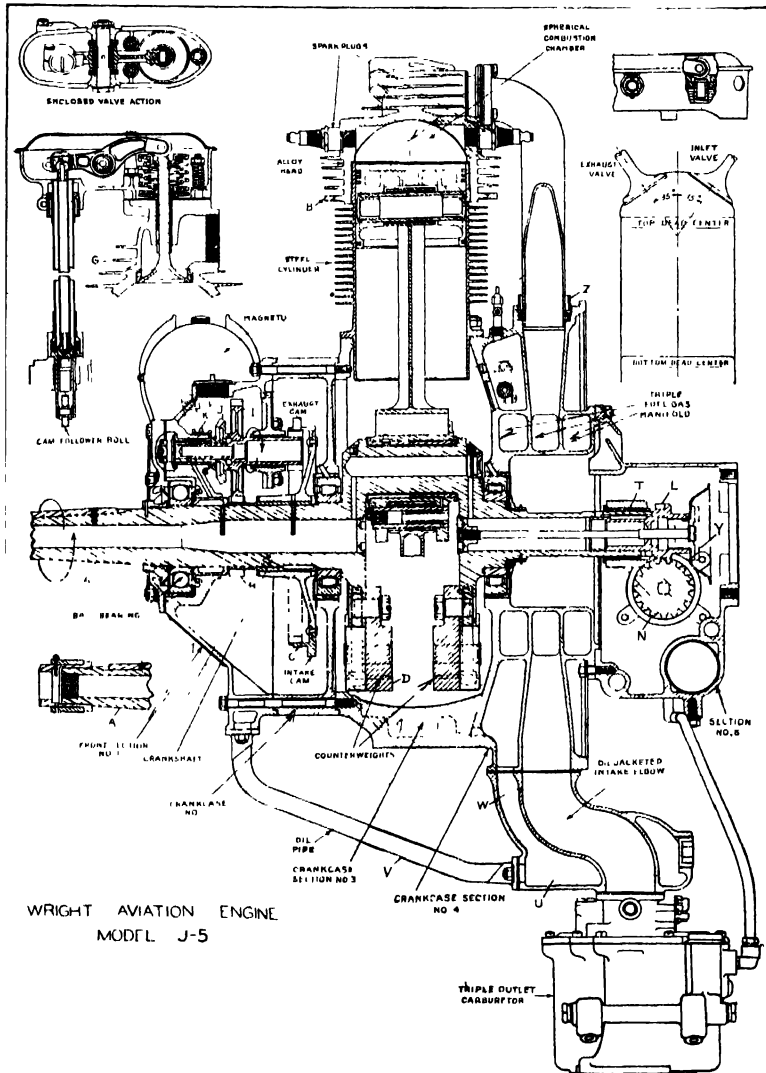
Transverse Sectional View of "Whirlwind" Model J5 Engine Showing Improvements in Cylinder Construction and Valve Gear.
